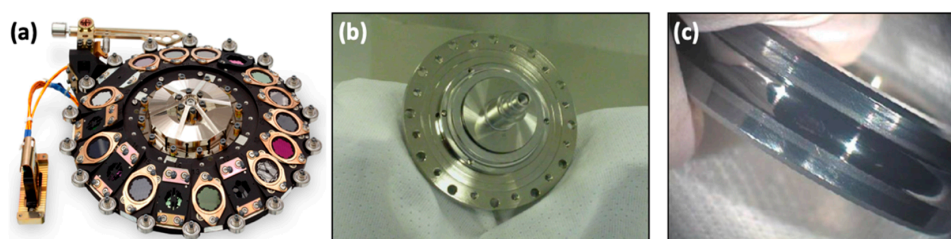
(a) The filter wheel assembly of the MIRI instrument on the JWST; (b) A bearing employed in the filter wheel assembly; (c) The MoS₂-coated bearing race featured in the bearing. (a) and (b) reproduced from [50] with SPIE permission. (c) Republished with permission of IOP Publishing from [7]; permission conveyed through Copyright Clearance Center, Inc.
